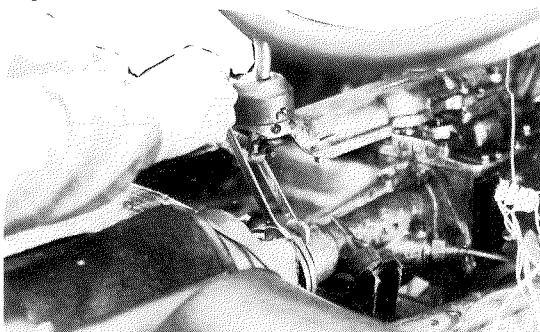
The front and rear propshaft bolts can now be removed and after allowing the exhaust to hang loose to the rear, slide the prop out. Sometimes the front flange can catch on the shaft tunnel so just take your time and guide it through. Of course on ours the rear flange bolts were very tight and took ages to shift - best to fit new bolts and nylocs.
